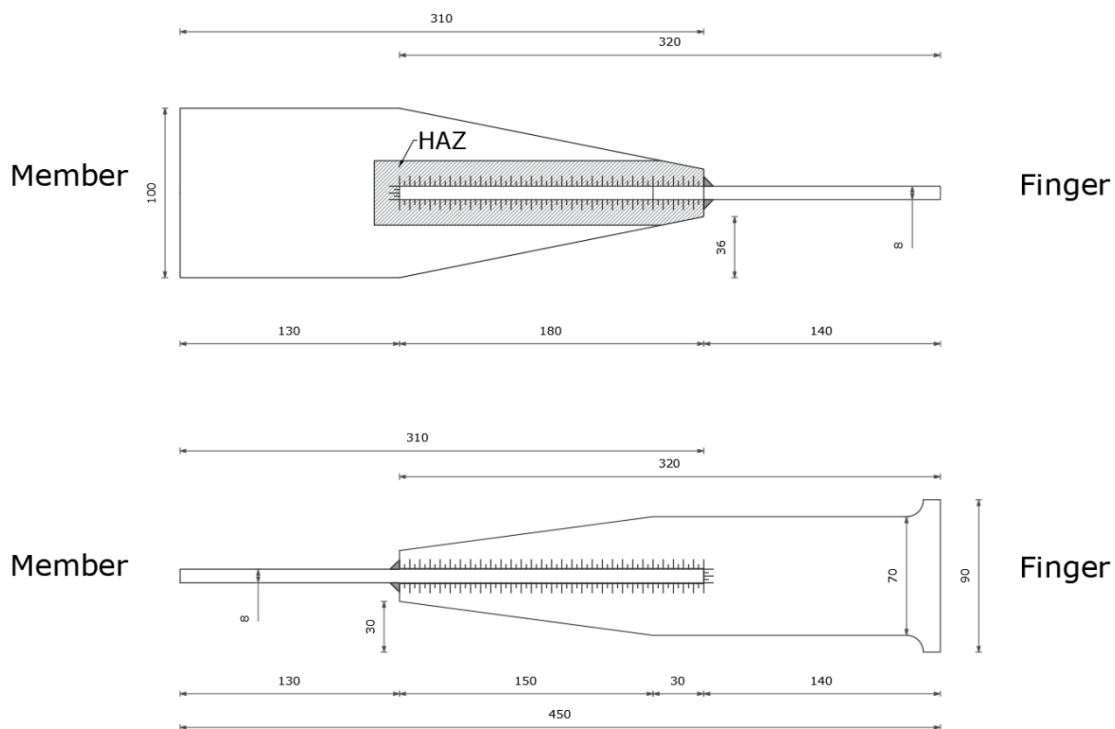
Applied dimensions in the numerical model of the welded cruciform variant 3.
